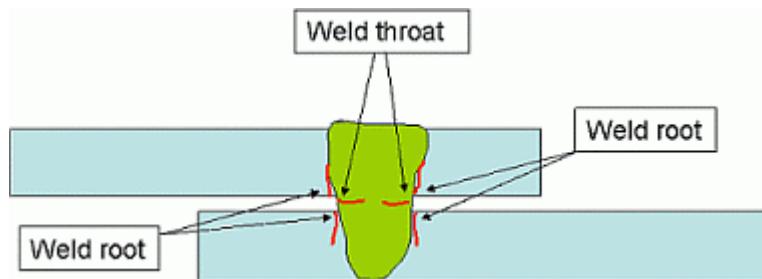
Transition of weld from fillet to overlap.
